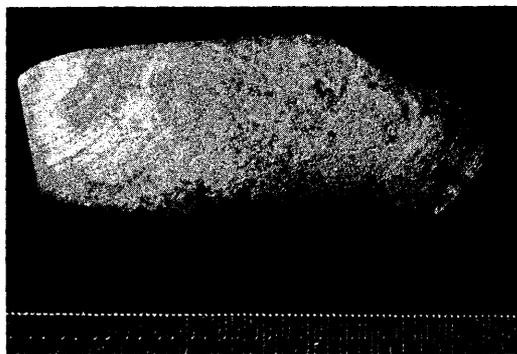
Magnetic particle indications of fatigue cracks in a gear
